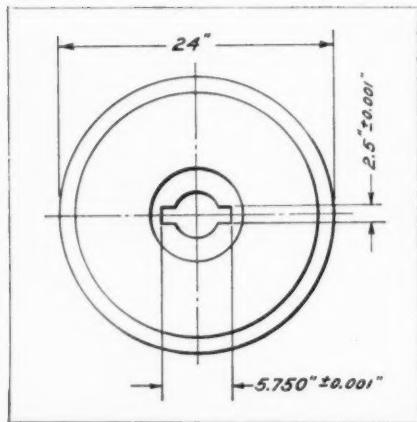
Details of Deep Keyways Cut on Machine in Fig. 2 without Using Special Tools
